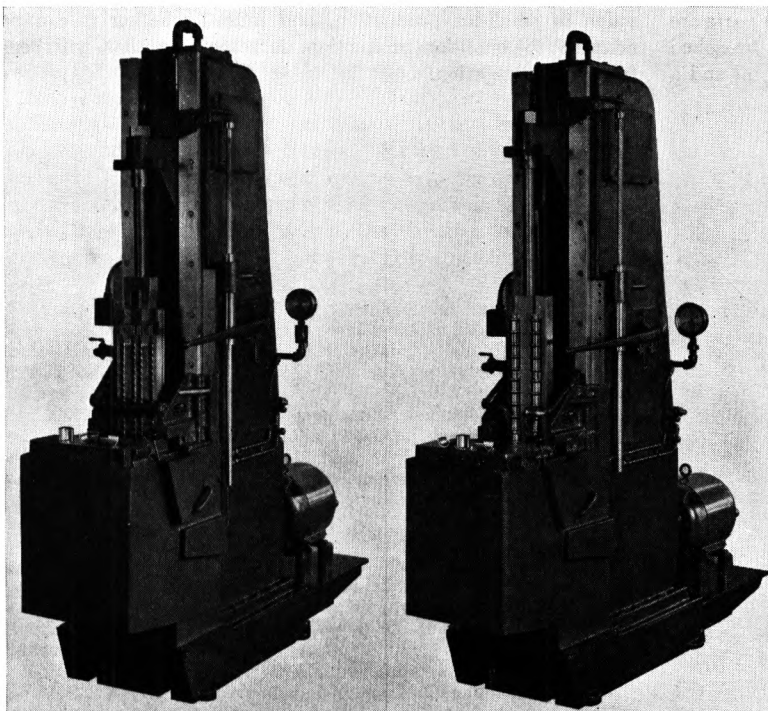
MACHINES FOR BROACHING THE BEARING FACE AND THE PARTING LINE OF STEEL-BACKED, CONNECTING-ROD BEARINGS
